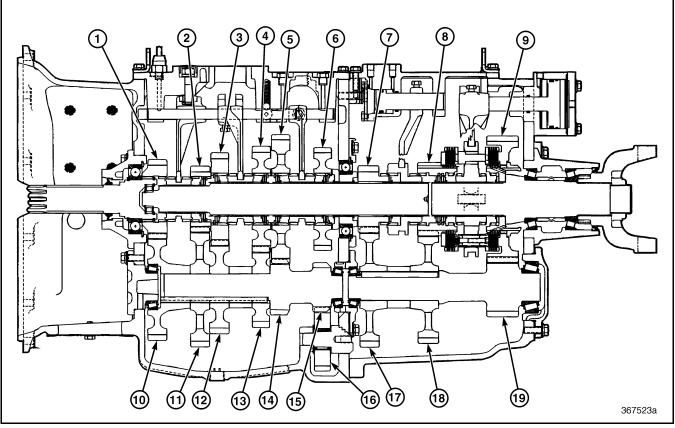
Gear Identification (T313L21/T318L21 Shown)
